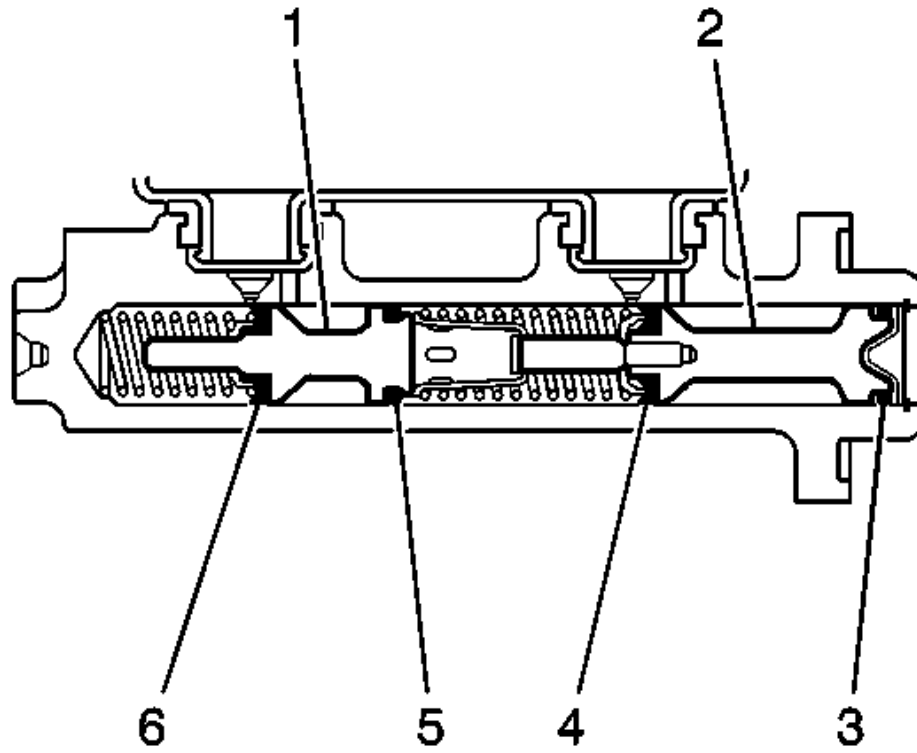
Identifying Brake Master Cylinder (Cross Sectional View)
